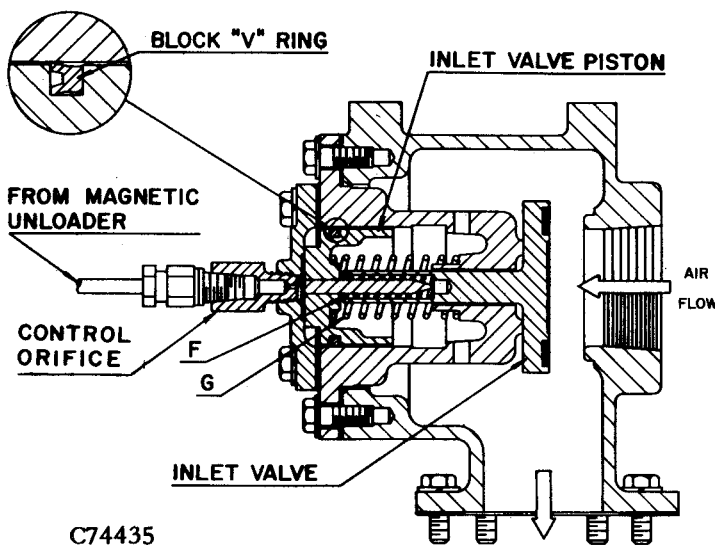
INLET VALVE FOR DUOMATIC CONTROL
